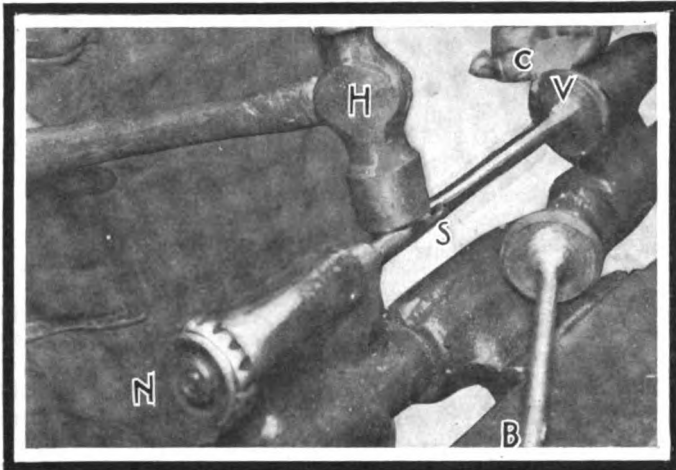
Truing up the stem of a valve after cotter pin slot is stamped
